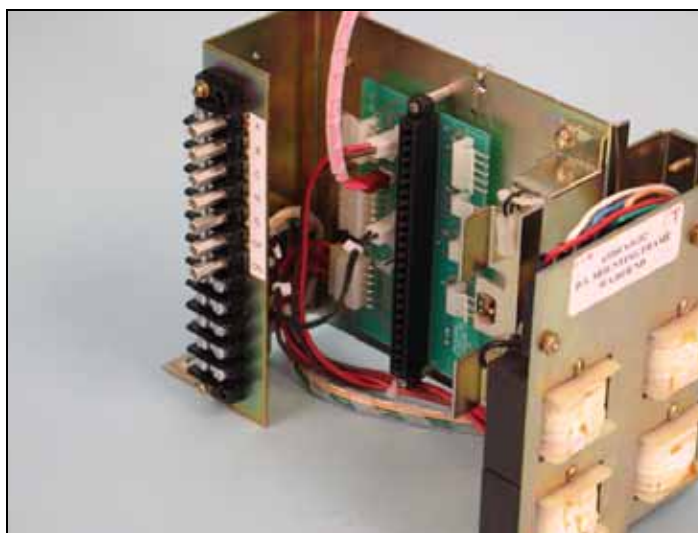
New DS Interface Board Installed on the Trip Unit Mounting Frame.
